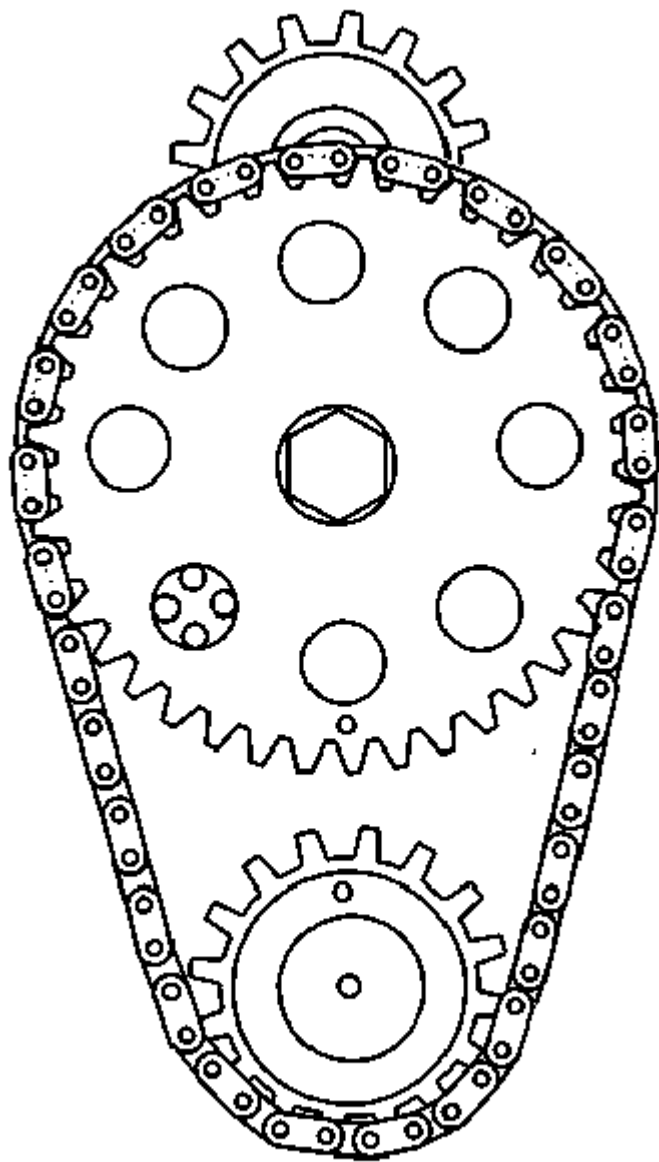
View of Crankshaft Balancer Key & Timing Belt
